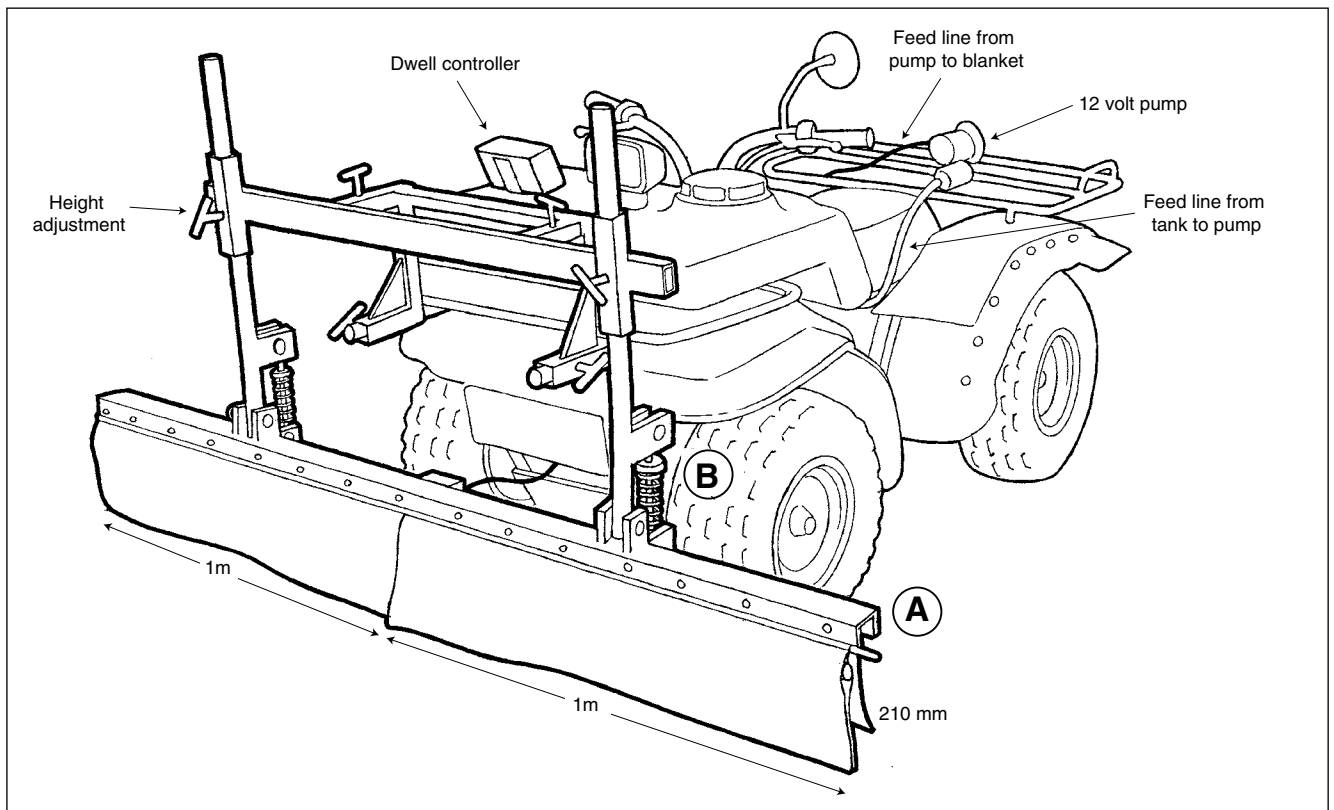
Front-mounted 2 m blanket wiper. A and B details are given in Figures 5 and 6.
